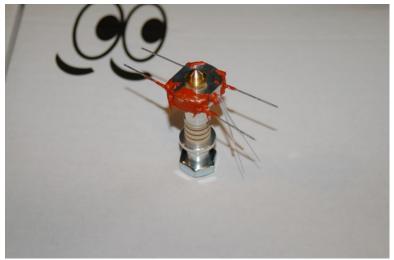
Hot end plugged into the cardboard box for curing.
